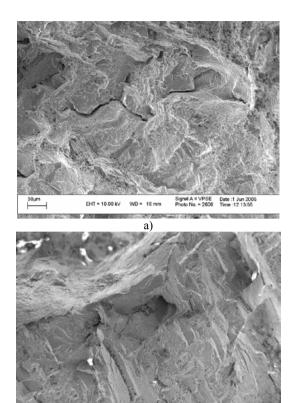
Fractograph of a specimen fractured at 550°C
